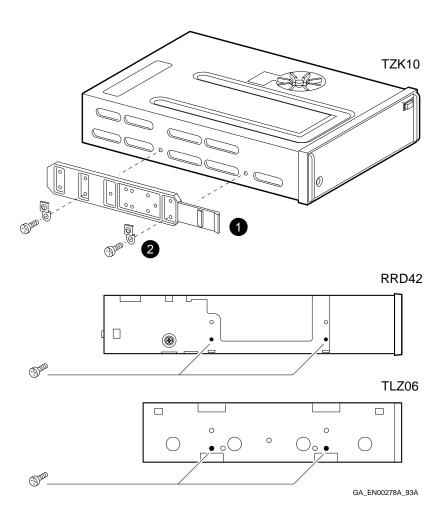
Attaching Slide Rails to 5.25-Inch Drives
